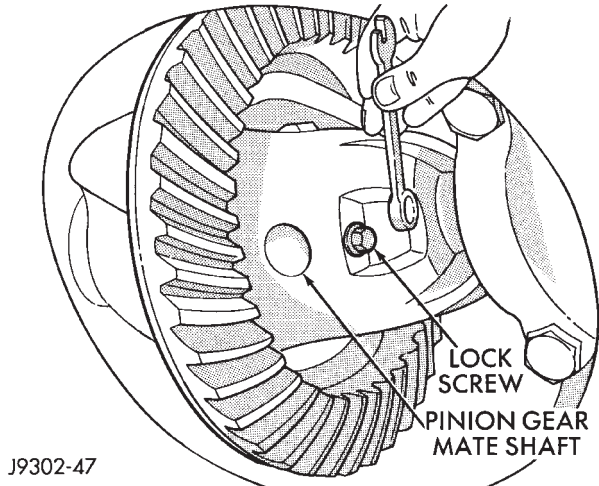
Pinion Gear Mate Shaft Lock Screw
